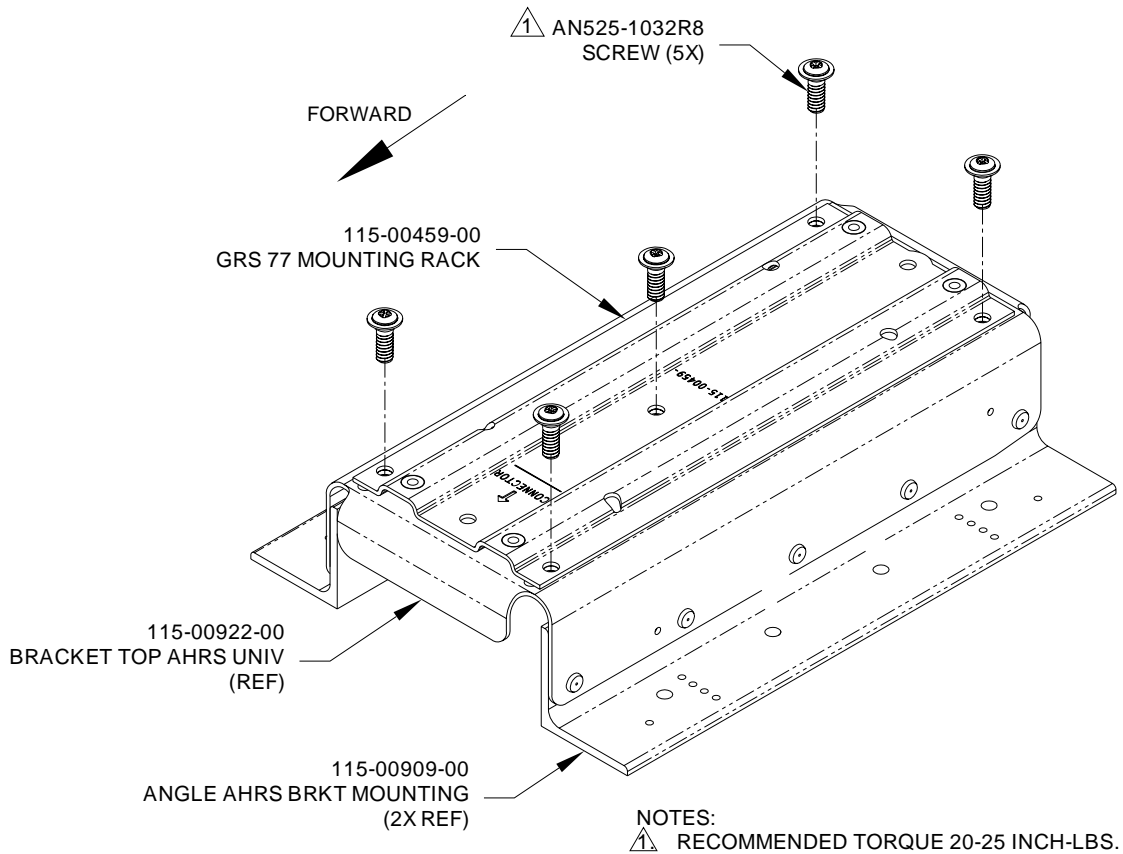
Assembling GRS 77 Mounting Rack to GRS 77 Universal Mount
